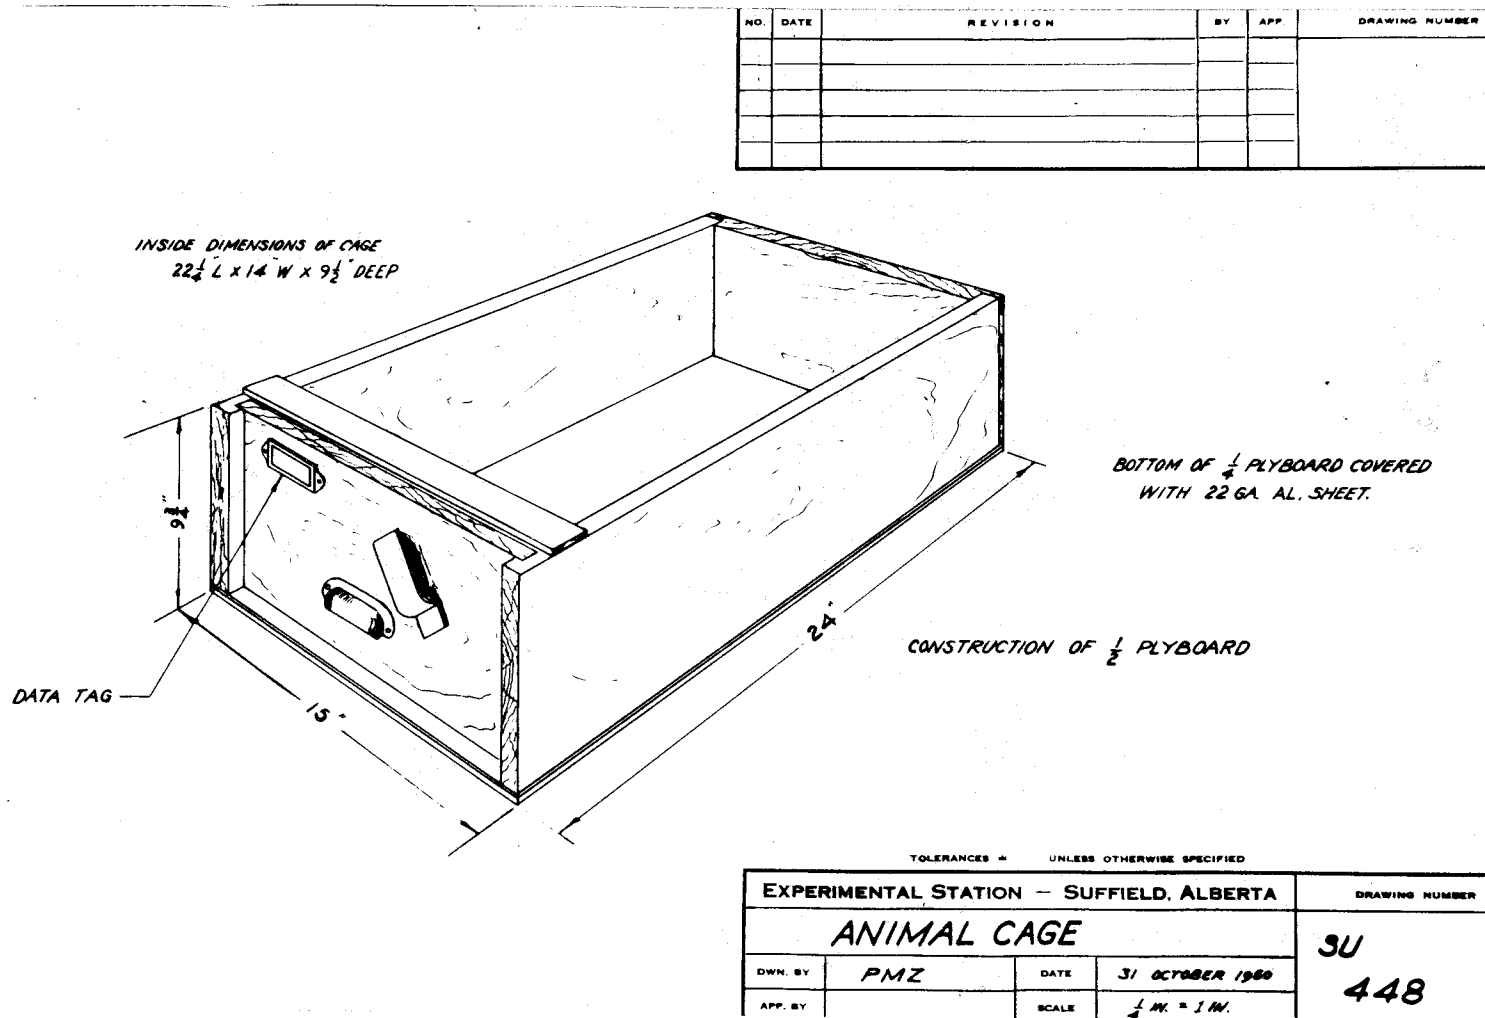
Scale drawing showing specifications of guinea pig cage.
